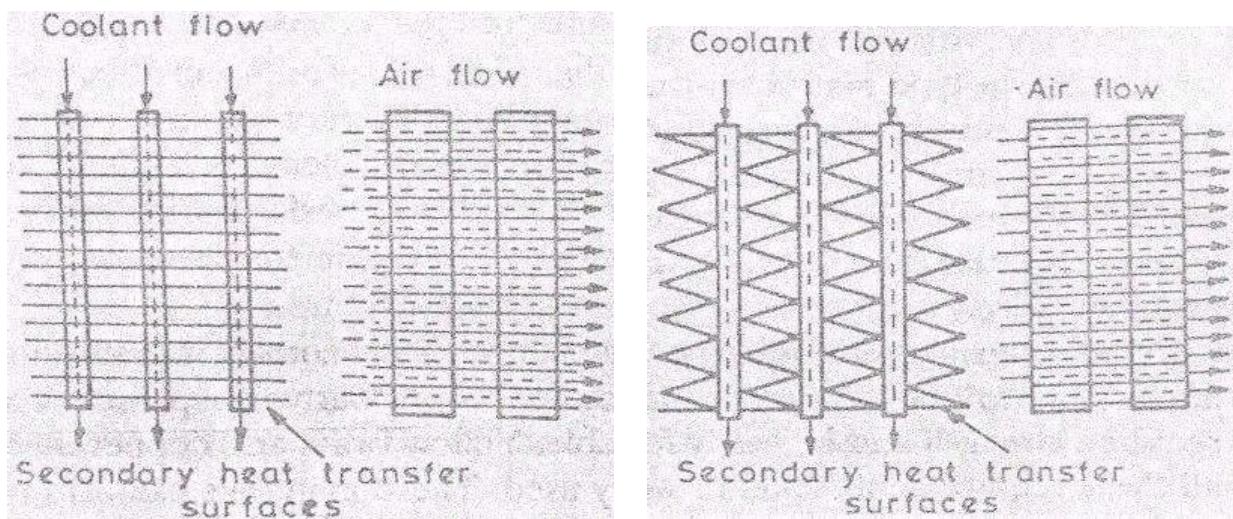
Tube and fin type core and Tube and corrugated type core
